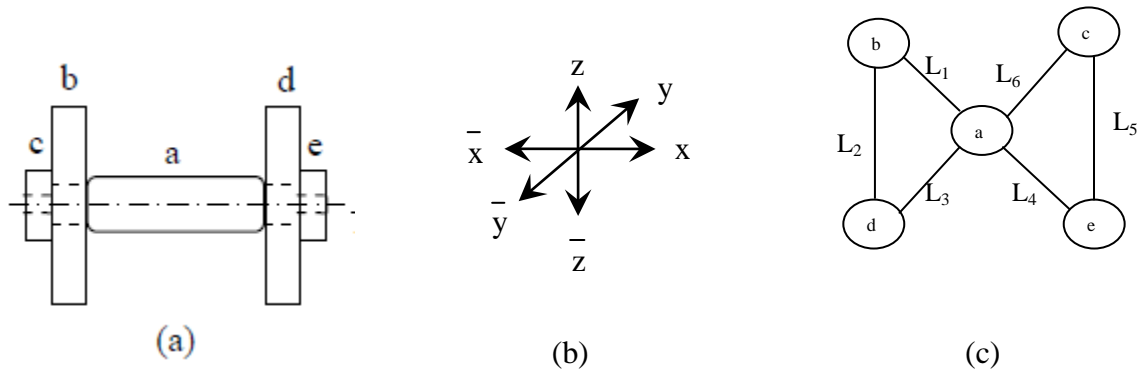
(a) A simple example of a product (Grinder assembly), Figure 3.2(b) Directions for assembly. Fig 3.2 (c) Liaison graph model of grinder.
